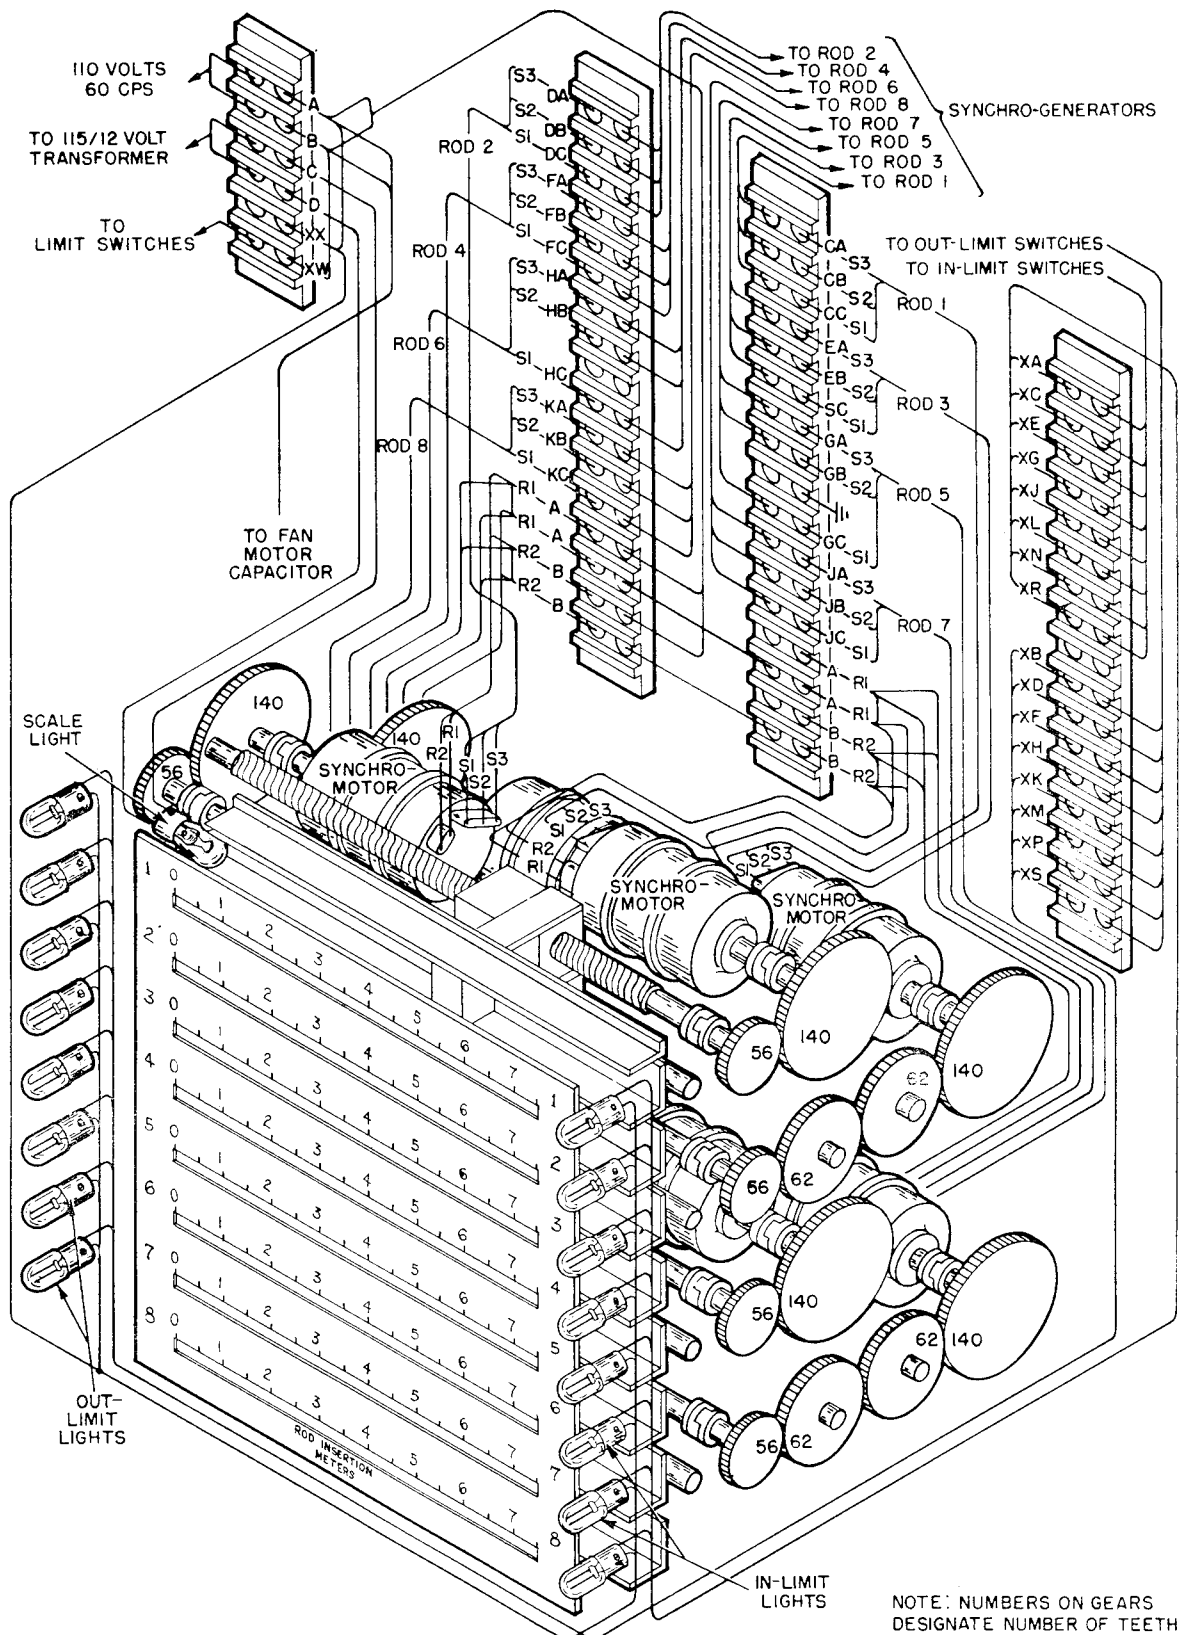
COARSE ROD-POSITION INDICATOR
